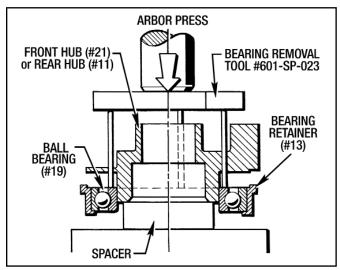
Removing Ball Bearings (#19) and Bearing Retainer (#13) from Hub
